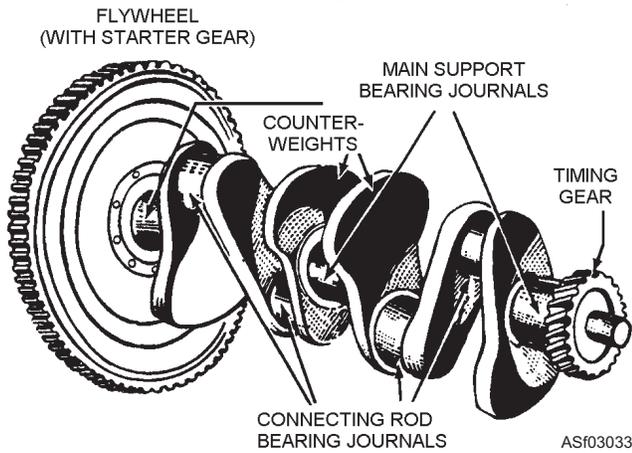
Crankshaft of a 4-cylinder engine.
